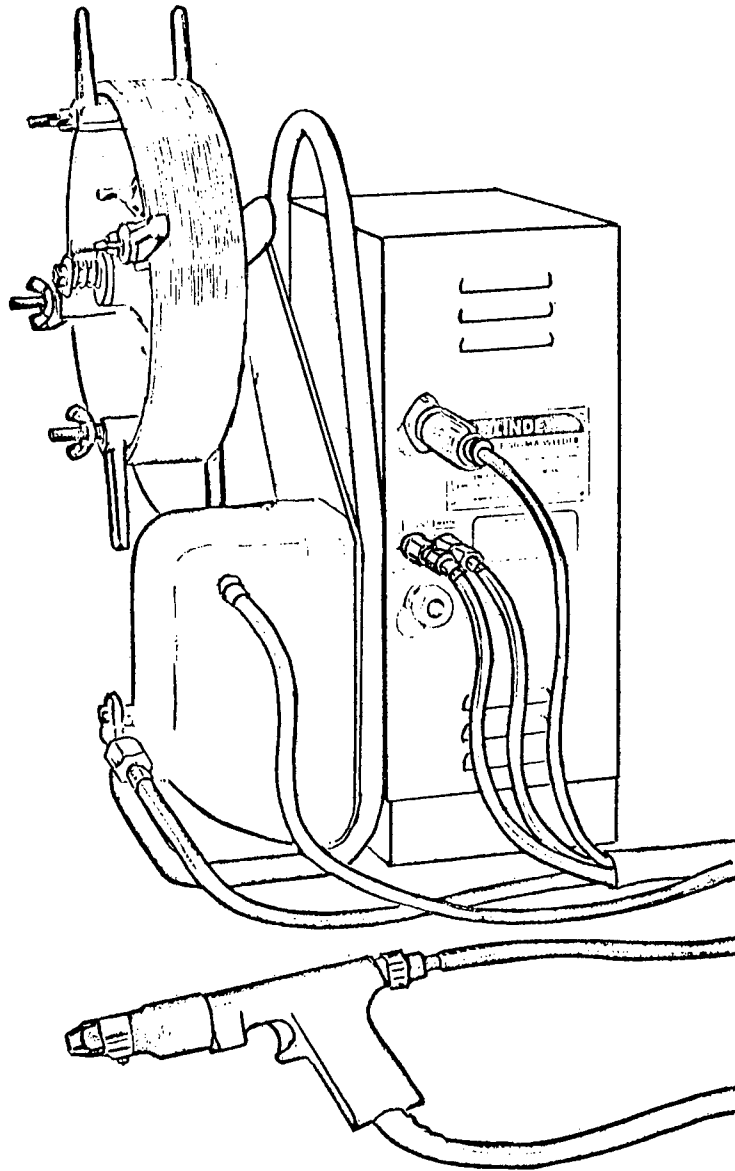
Typical Equipment for Inert Gas Shielded Consumable Electrode Welding
